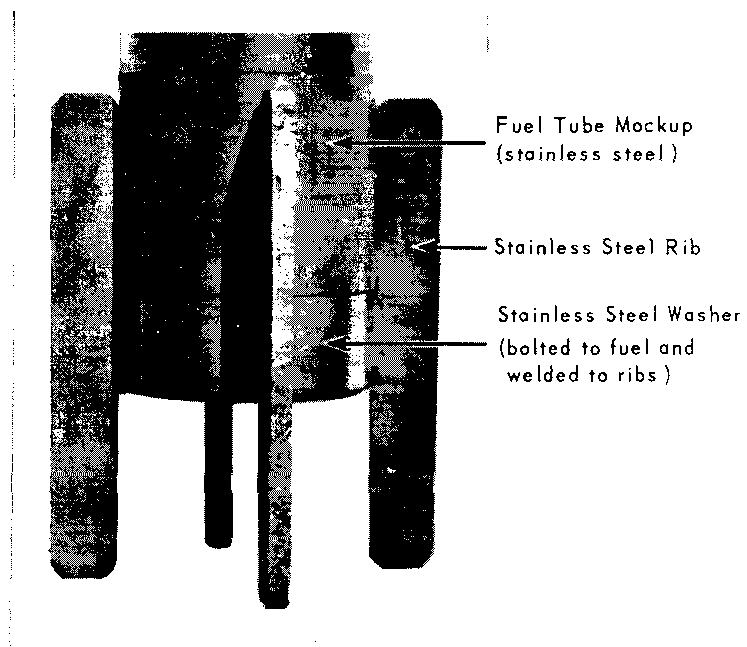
SECTIONS OF WELDED RIBS ON ZIRCALOY HOUSING TUBES
